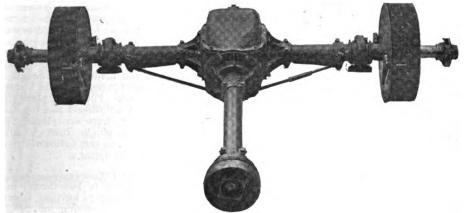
The floating rear axis and propeller shaft housing of the 1909 American, showing the double set of brakes, two bands acting on each drum. The drive from the gear set is by a propeller shaft acting through a pair of bevel gears to the differential, from which the power is transmitted to each rear wheel by a floating axis or shaft, which engages the wheel hub by means of a claw coupling, the female part of which is integral with the wheel hub.
